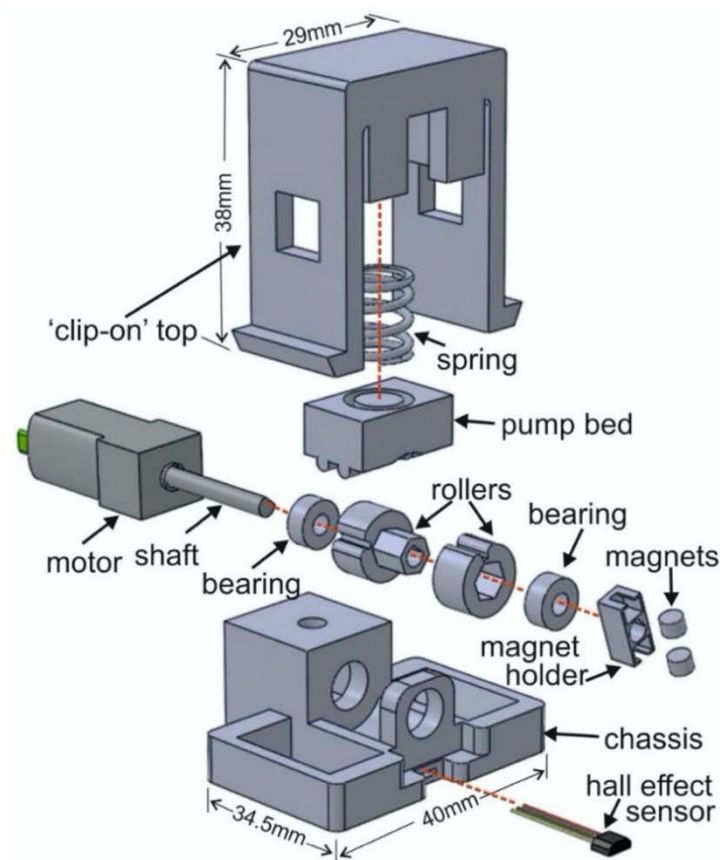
Exploded diagram of two-line, single spring pump showing the different components: chassis, 'clip-on' top, spring, pump bed, motor, motor shaft, bearings, rollers, magnet holder with magnets and a Hall Effect sensor.
